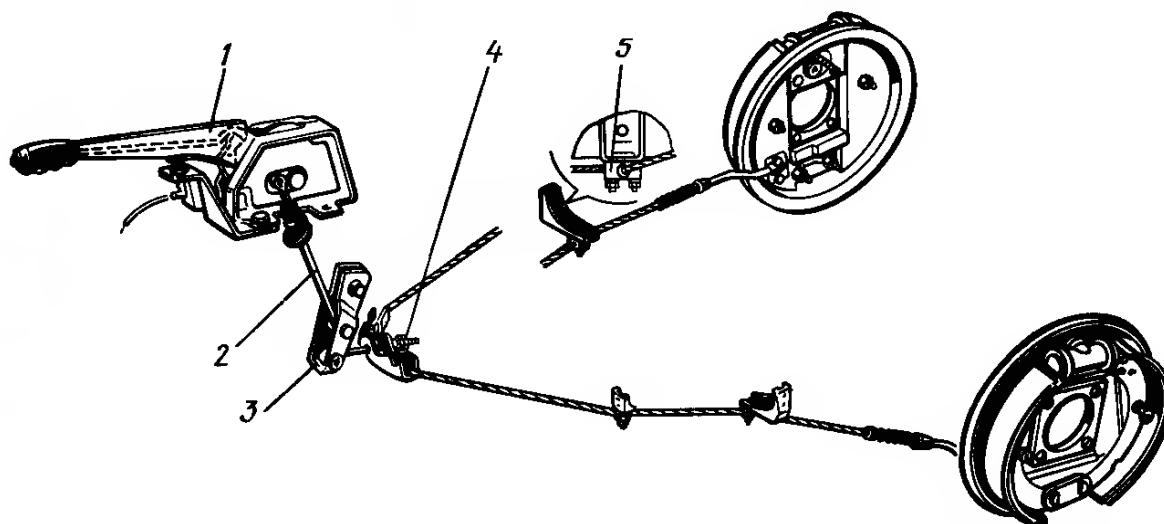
The mechanical drive of the parking brake system:
